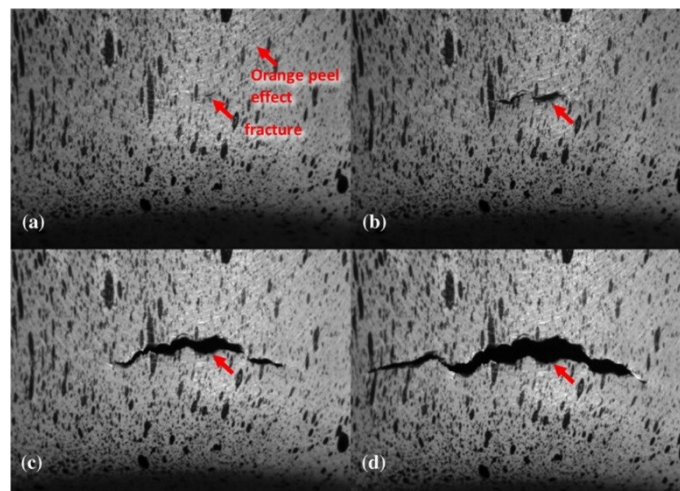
Detailed view of the fracture evolution in aluminium alloy AA1100 sheet: a) first pass after fracture, b) second pass, c) third pass, d) fourth pass [156].
